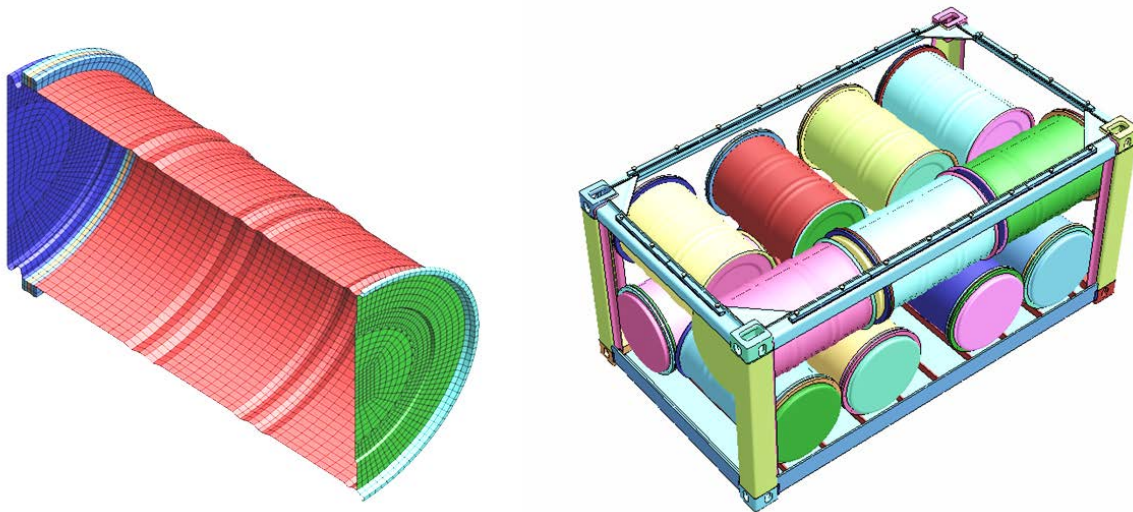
Cut section of drum and arrangement of the drums inside the package.
